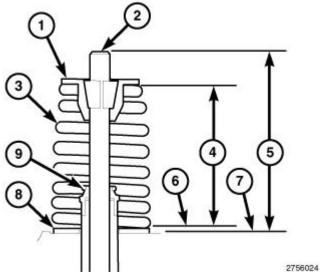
Checking Valve Spring Installed Height Courtesy of CHRYSLER GROUP, LLC
